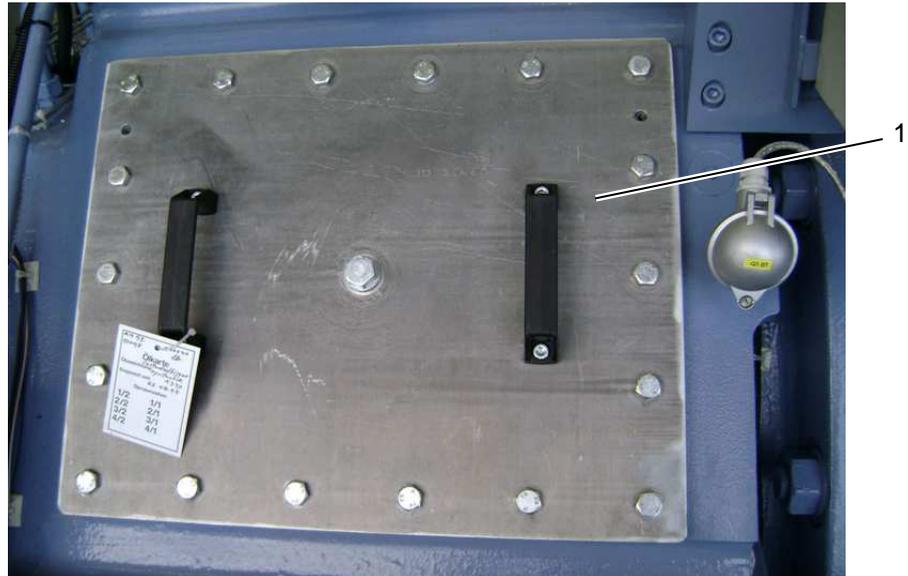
1E Inspection cover (manufacturer Eickhoff)
